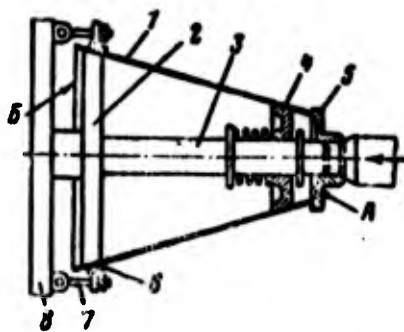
Diagram of the fitting for facing of thin-walled cone parts. 1 - machinable part; 2 - fixed cone disk; 3 - axis; 4 - mobile disk; 5 - clamp; 6 - lathe dog; 7 - folding bolt; 8 - face plate.
